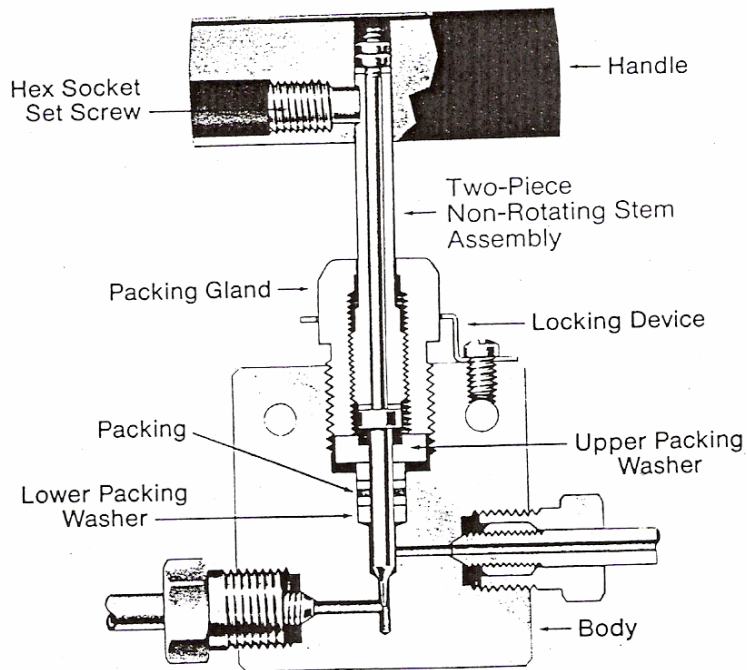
Throttling valve assembly. Source: Autoclave Engineers Catalog 1500-2.
